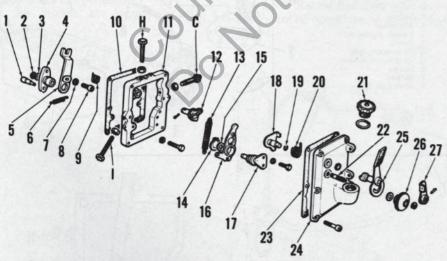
Exploded view of governor and throttle control linkage.
